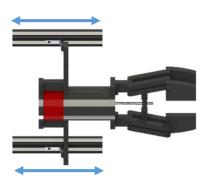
SolidWorks design of the manipulator's mechanism. Designed by Hossam and Rana.
